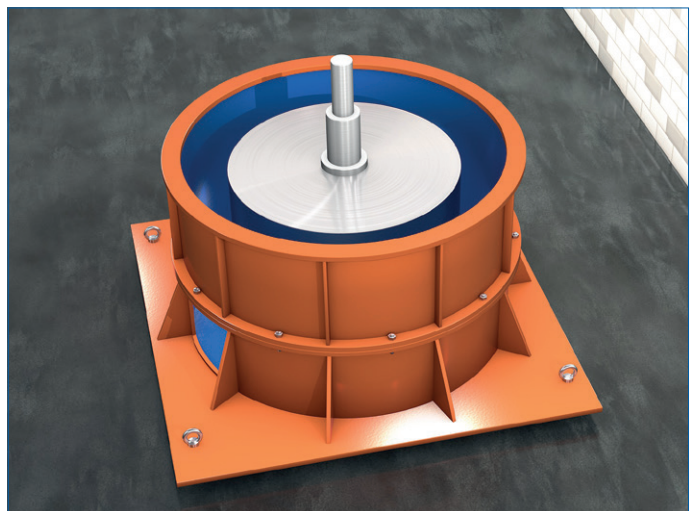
Vertically mounted flywheel (driven via a universal-joint shaft,  $D = 790$  mm)
